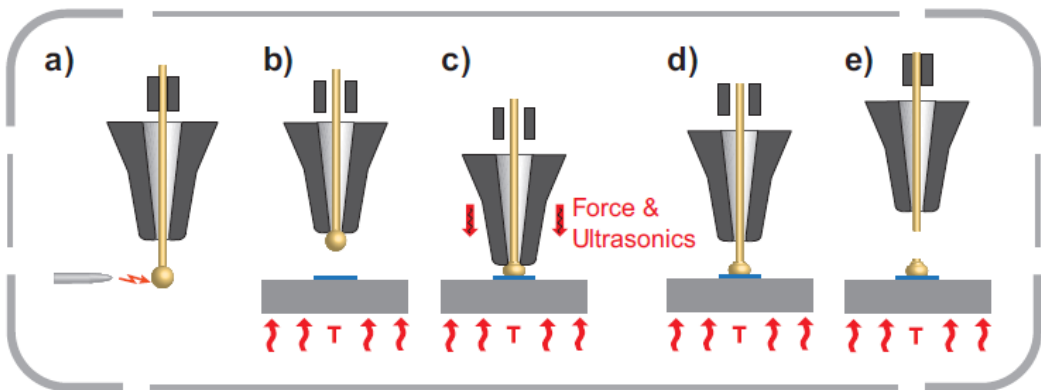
Schematic illustration of the stud bumping process fabricated using thermosonic bonding. Reproduced from [57].
